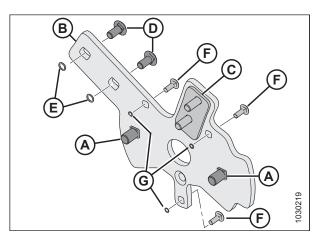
Bolts Installed in New Right Auger Support Bar
